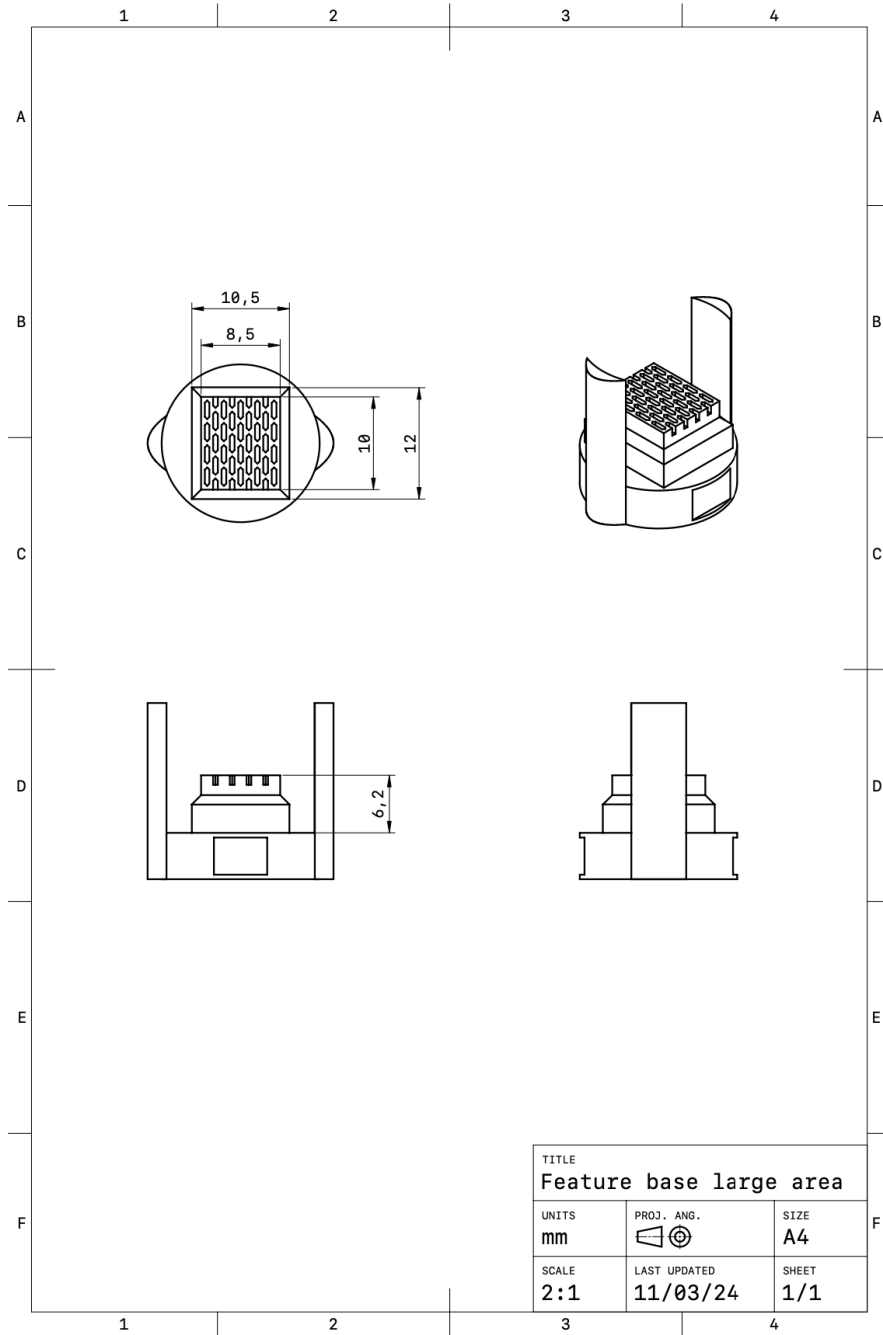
Technical drawing of the upscaled feature base with a seeding area of 52.70 mm<sup>2</sup>. Further mould details can be seen in Fig. 23.
